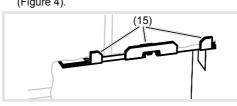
Installation position of fastening elements (15) Support bracket of the fastening elements
